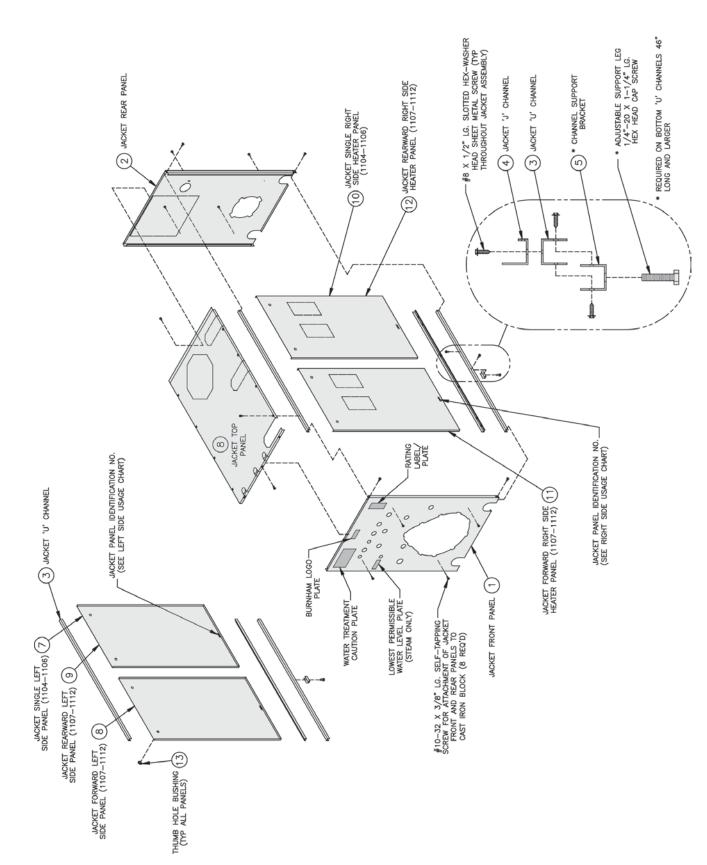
V11 Series Jacket Assembly (Boiler Models V1104 Thru V1112)
